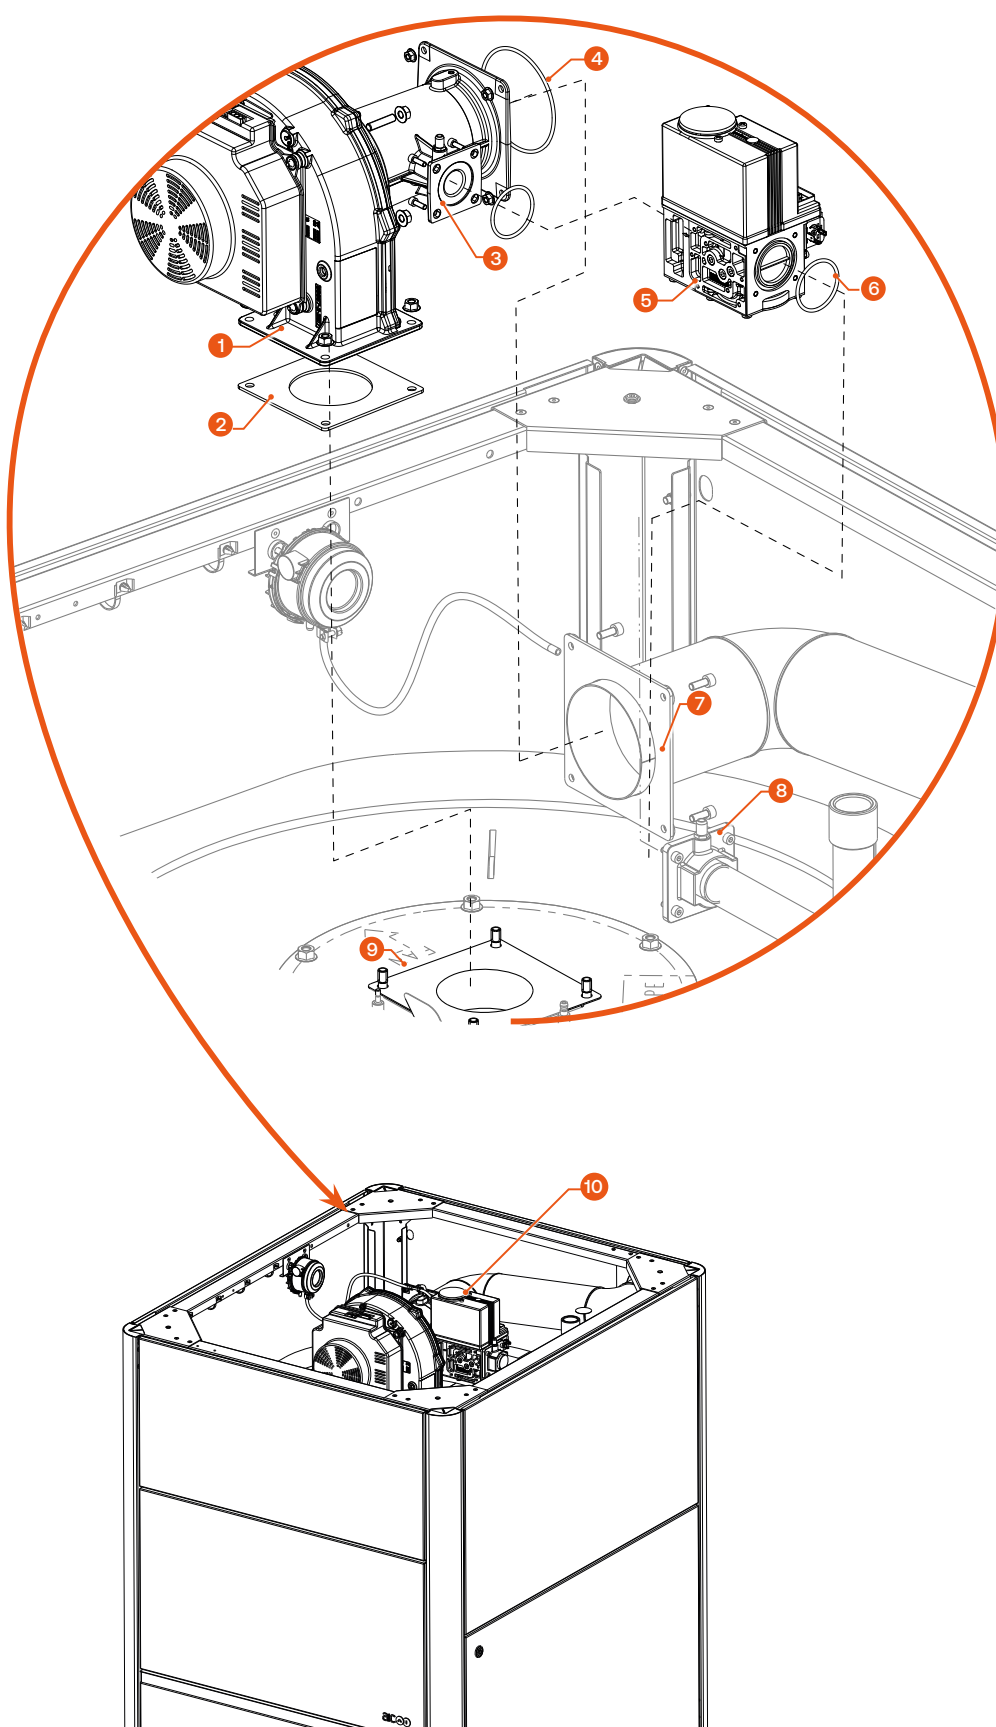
TEXAS 230 - Removing and Installing the Fan/venturi/Gas Valve Assembly
